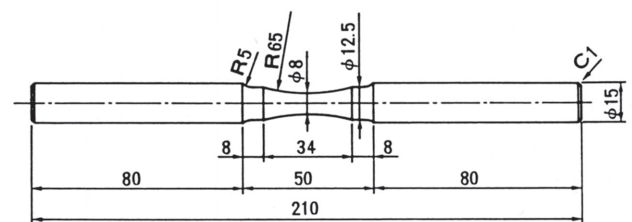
Shape and dimension of specimen for rotating bending fatigue.
